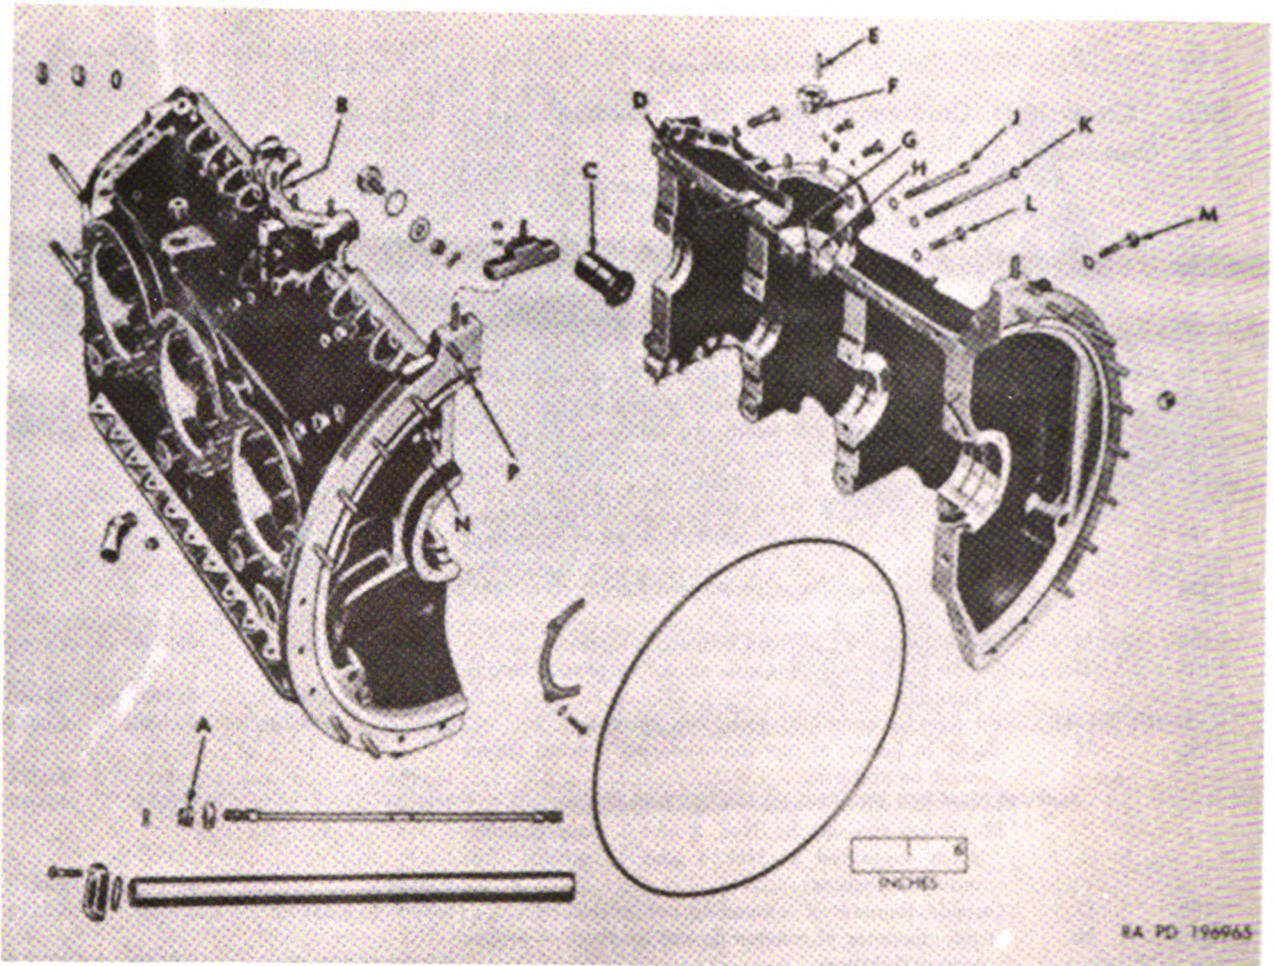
Repair and rebuild standard points of measurement for crankcase and fan drive shaft bearings.
